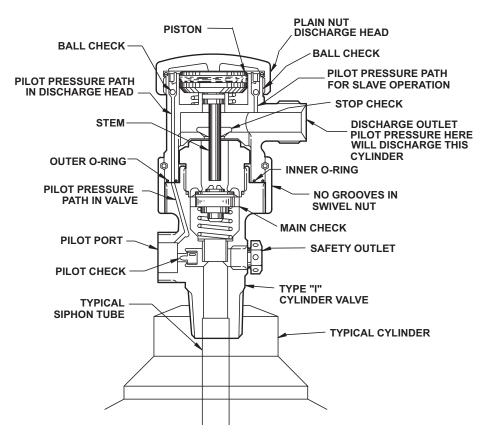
Assembly of Plain Nut Discharge Head to Type "I" Cylinder Valve
